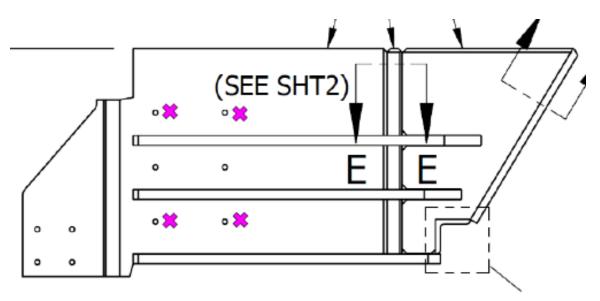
Strain Gage Locations on CEM Locomotive Draft Pocket
